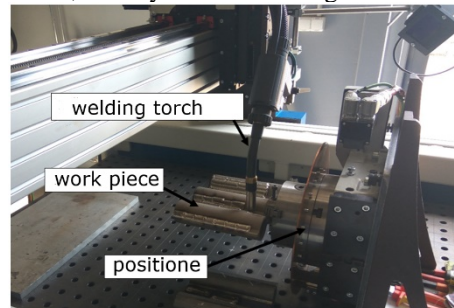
Equipment for performing the experimental part display of the compressed sample in the positioner
